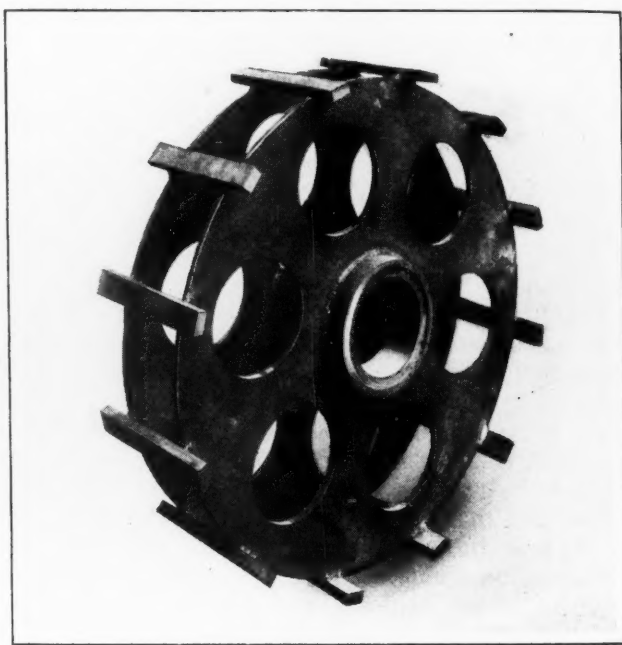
Armature Spider Constructed of Disks, Plates, and Bars Welded Together
